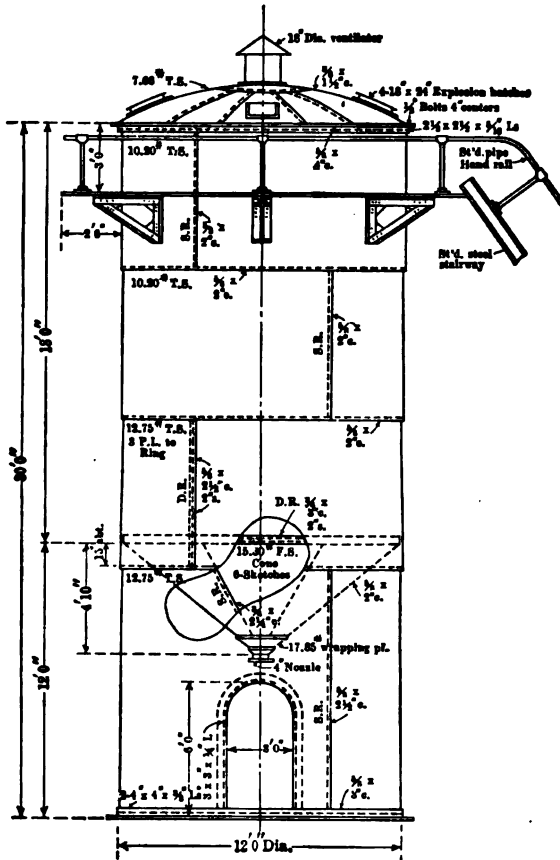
Details of a 375-barrel light-oil agitator 120 diameter by 30.0°.
